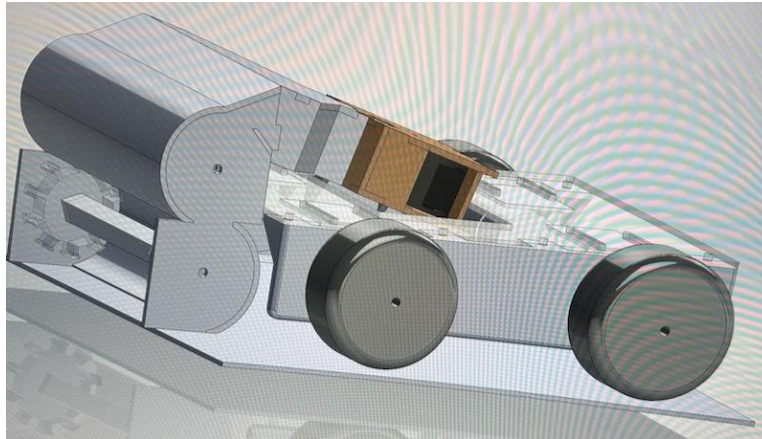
Early CAD Prototype Highlighting Initial Dice Collection Mechanism.
